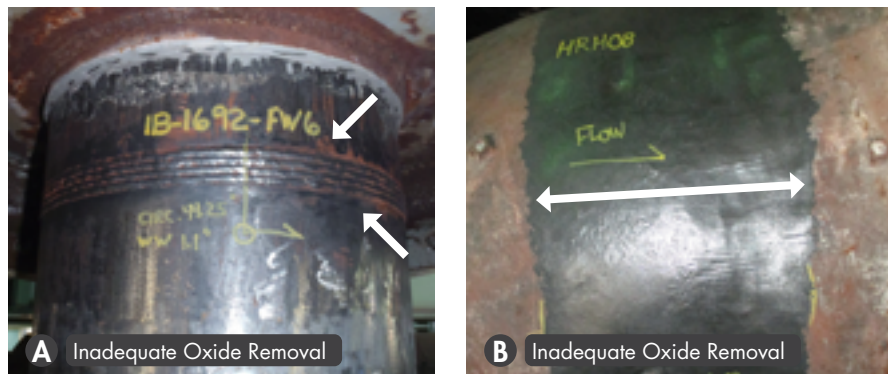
Examples of Improper Surface Prep (A) by Light Hand Grinding and (B) Wire Brushing
